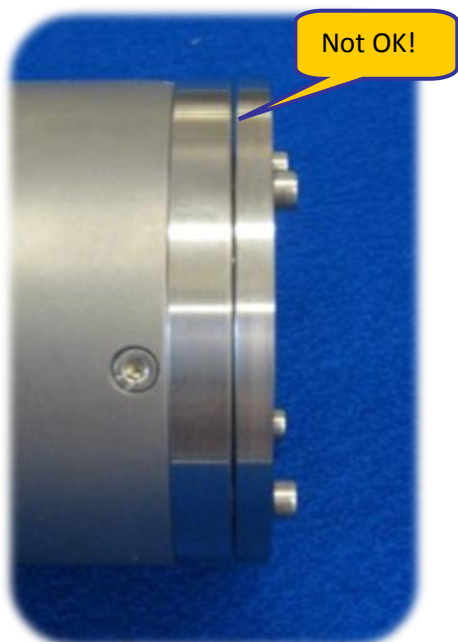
A small gap shows the non-constant pressure on the O-ring sealing. Check the O-ring to be well fitted and try again. Tighten the screws clockwise until they are completely fixed.
